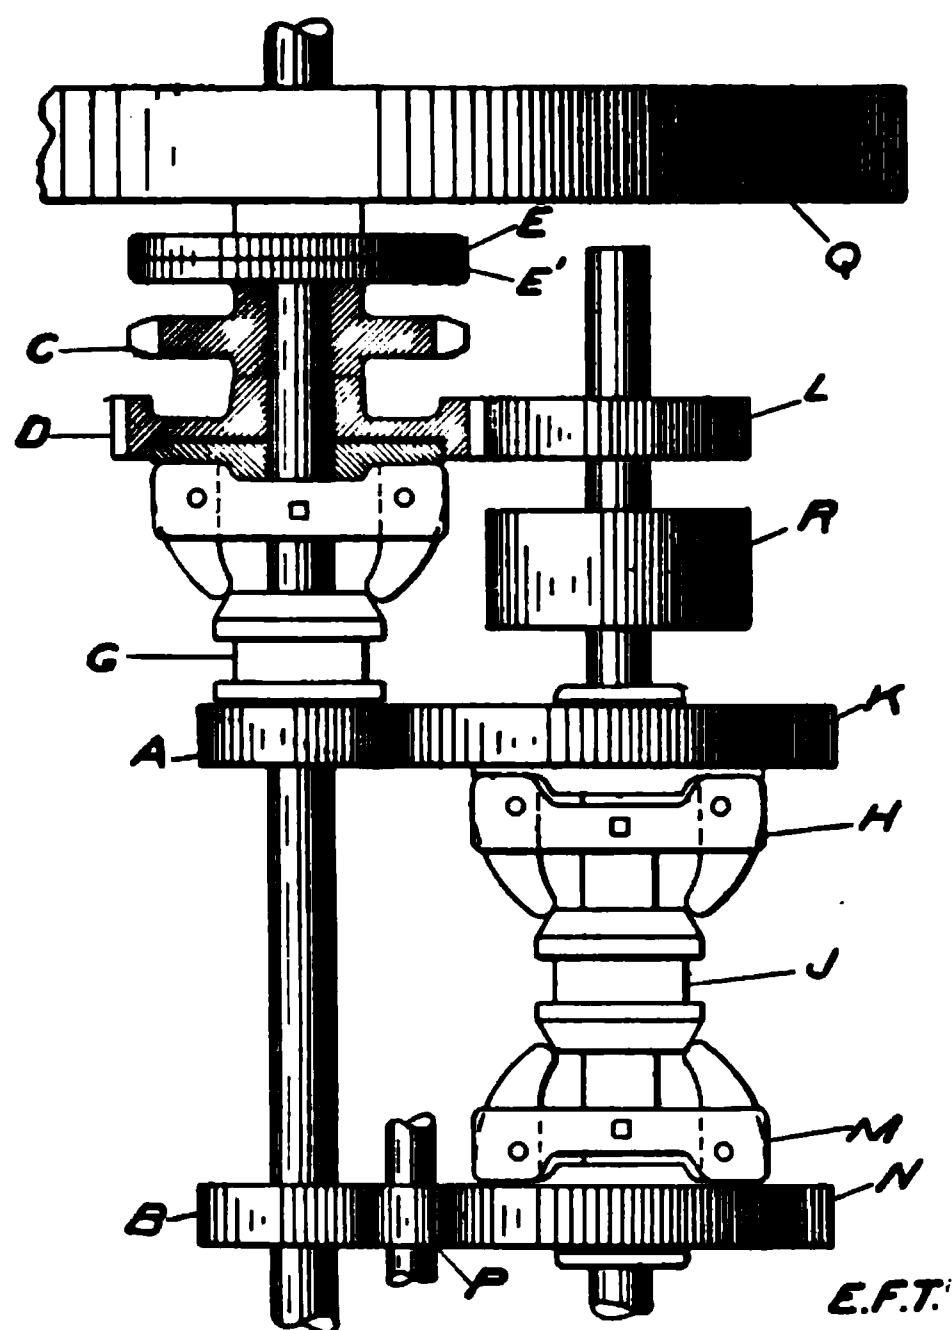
The Winton Change Speed and Reversing Gear. *A* and *B* are spur gears keyed to the crank shaft of the motor. *C* is a sprocket and *D* a gear, of one piece with it, which turn loose on the main shaft. *E* and *E'* are friction discs which connect *C* and *D* to the main shaft when the clutch, *G*, is thrown in. *K*, *L* and *N* are spur gears keyed to the counter-shaft, and meshing with *D*, *A* and *E* as shown. When clutch *G* is thrown in, the first speed forward is obtained; when clutch *H* is thrown in, the second speed forward; and when clutch *M* is thrown in, the reverse. The clutches, *H* and *M*, are operated by a lever actuating spool, *J*. *P* is an idler pinion reversing the motion transmitted from *B* to *N*. *Q* is the fly-wheel of the engine and *R* the sprocket drum.
